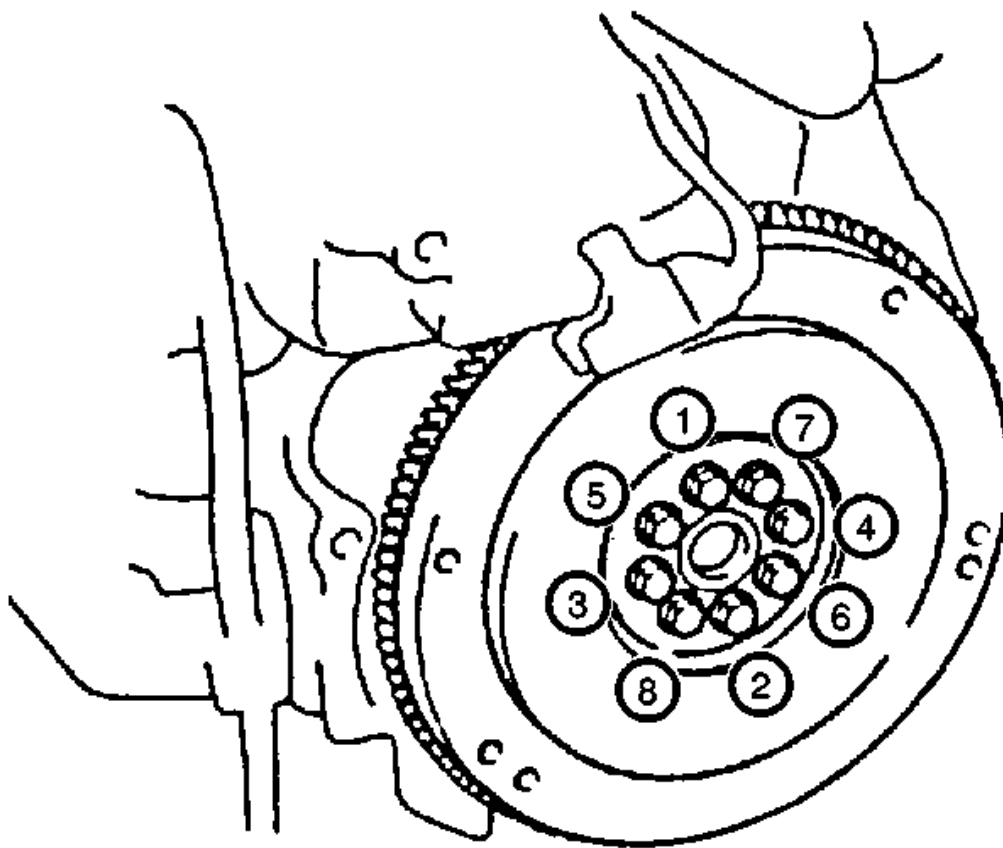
Identifying Flywheel Retaining Bolt Removal/Installation Sequence
